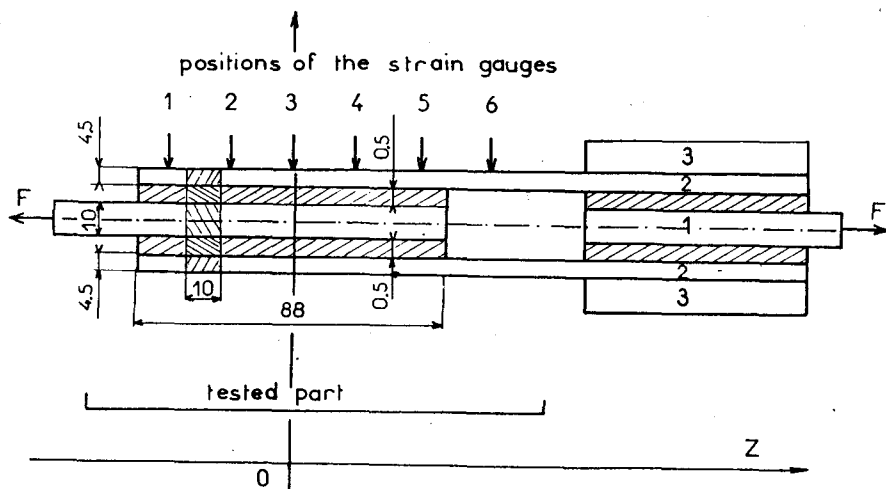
Schematic view of the test-specimen (dimensions in mm). A view of the cross-section is superimposed between gauges 1 and 2. 1' and 2' : adherends ; 3' : binding clip.
